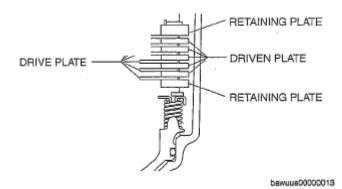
Inspecting Number And Order Of Retaining Plates, Drive And Driven Plates Courtesy of MAZDA MOTORS CORP.
